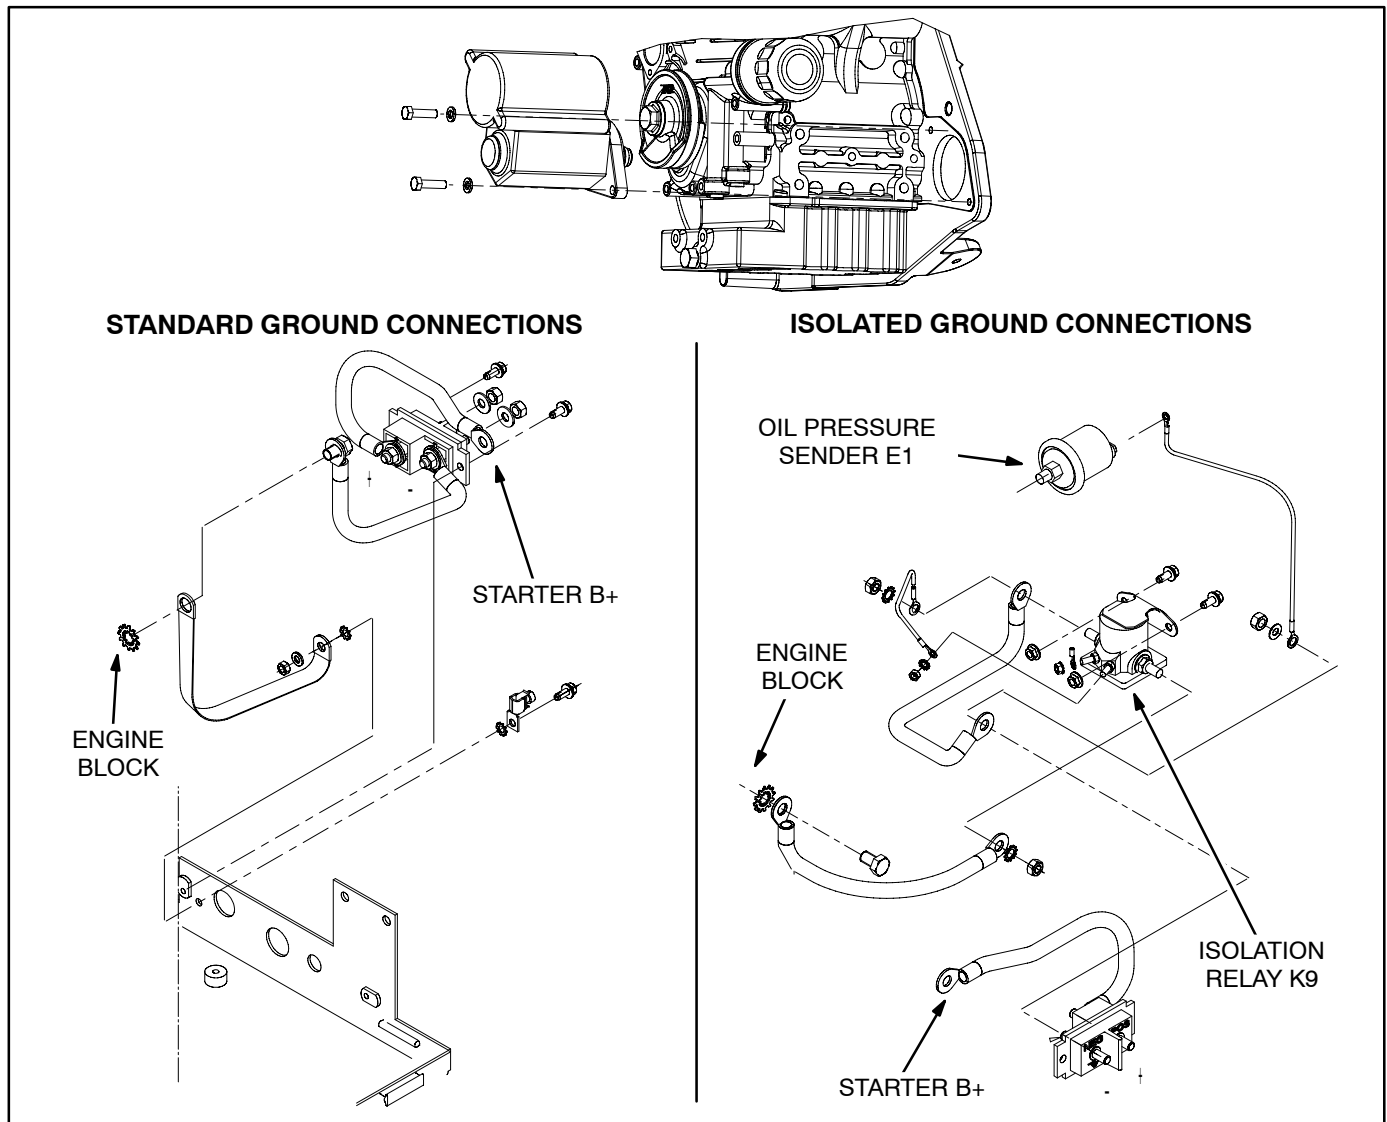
STARTER MOTOR MOUNTING AND CONNECTIONS
